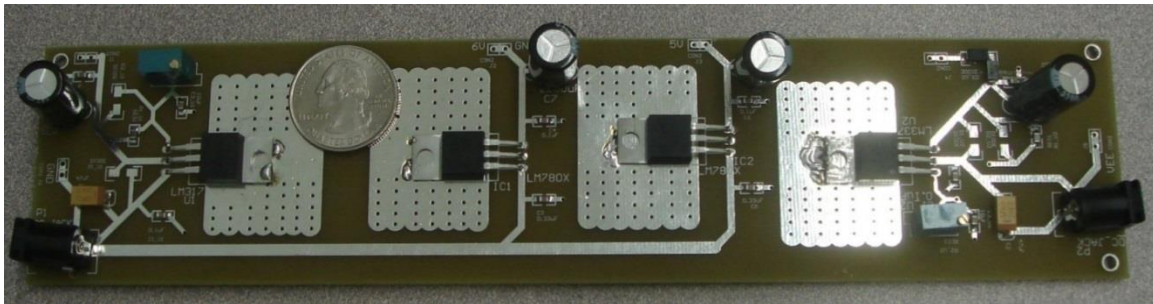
Original power supply for the prototype with dimensions of 2" x 8"
